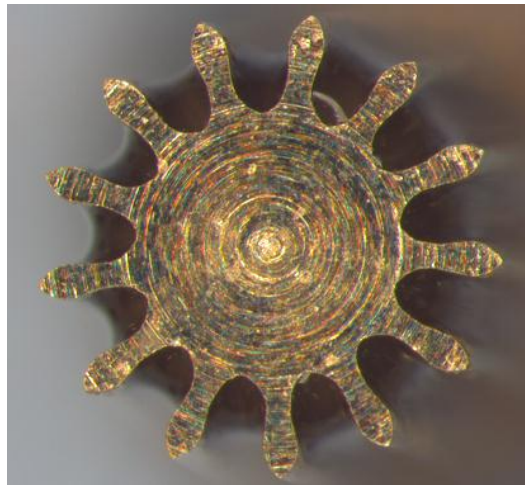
Gear with diameter of 1.2 mm also machined by gear hobbing
